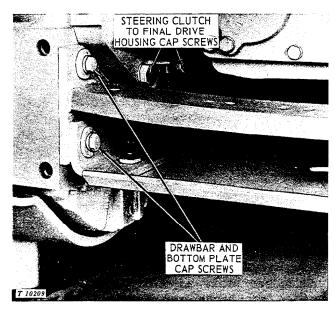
Removing Drawbar and Steering Clutch Housing Attaching Cap Screws
